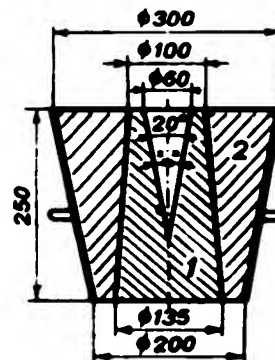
Mould used for the casting of conical samples. 1 : Dried sand mould. 2 : Dry sand No. 6
